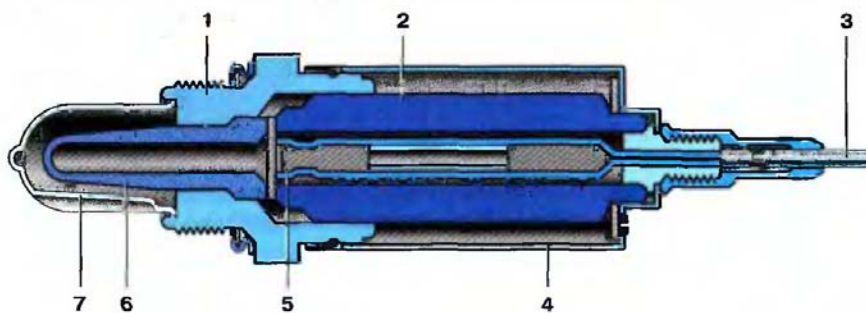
Zirconium oxygen sensor: 1 – housing; 2 – seal; 3 – connecting cable; 4 – casing; 5 – contact rod; 6 – solid electrolyte of zirconium dioxide;
